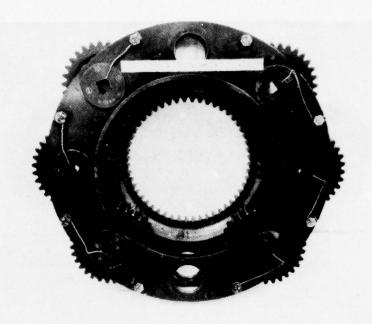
Upper planetary assembly after 25-minute loss-of-lube test for optimized transmission configuration number 1.
